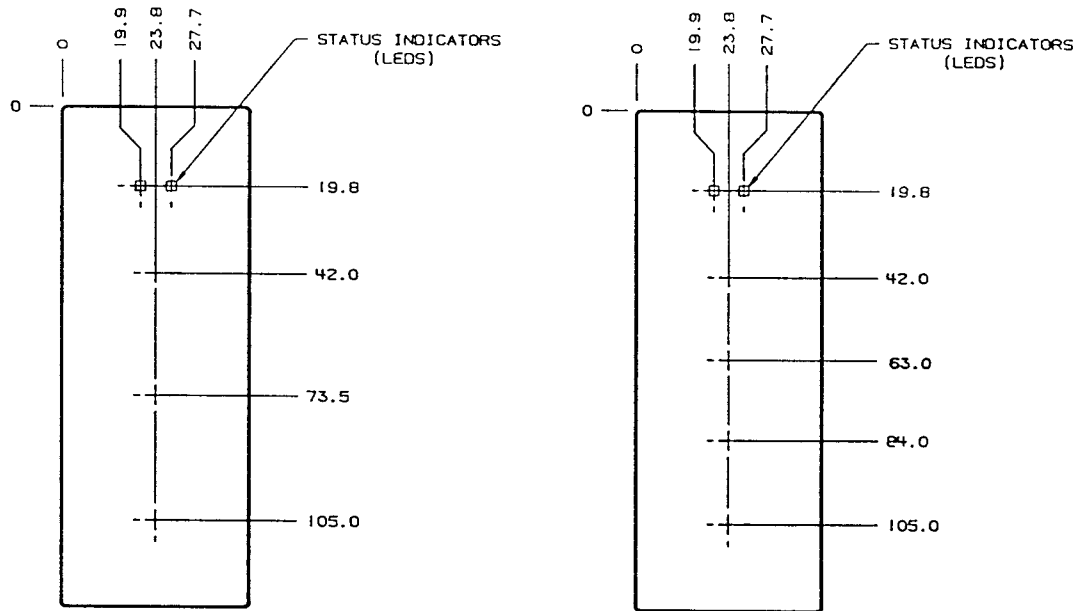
Front Panel 3 & 4 Component Gridwork, 1/8 Module
